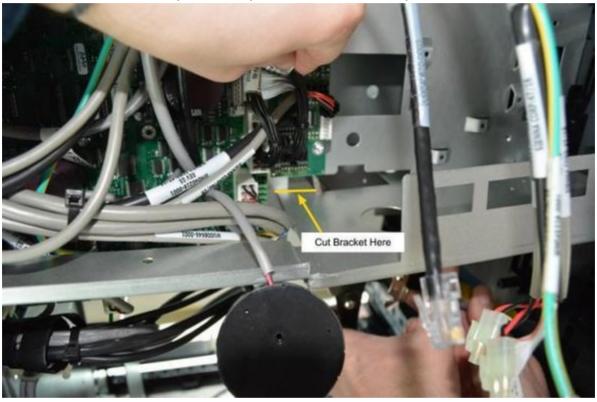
Cutting point on lower metal plate, behind Pump Controller Panel
